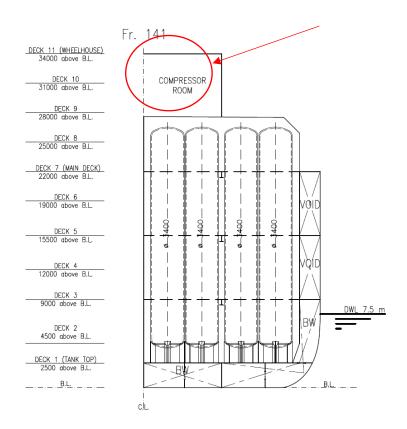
General arrangement of GASVESSEL with highlighted the position of the compression room – section view
